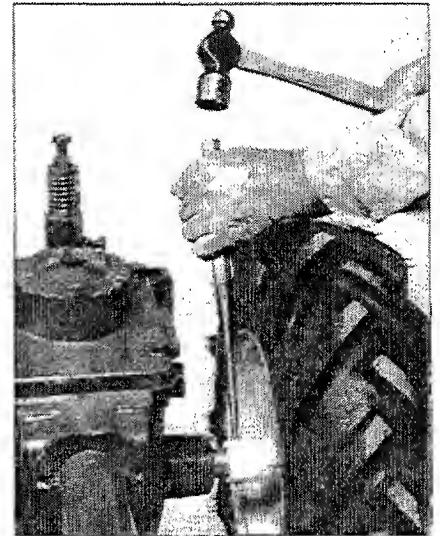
Drive roll pin out to remove wheel. Grease wheel shaft before replacing wheel.
